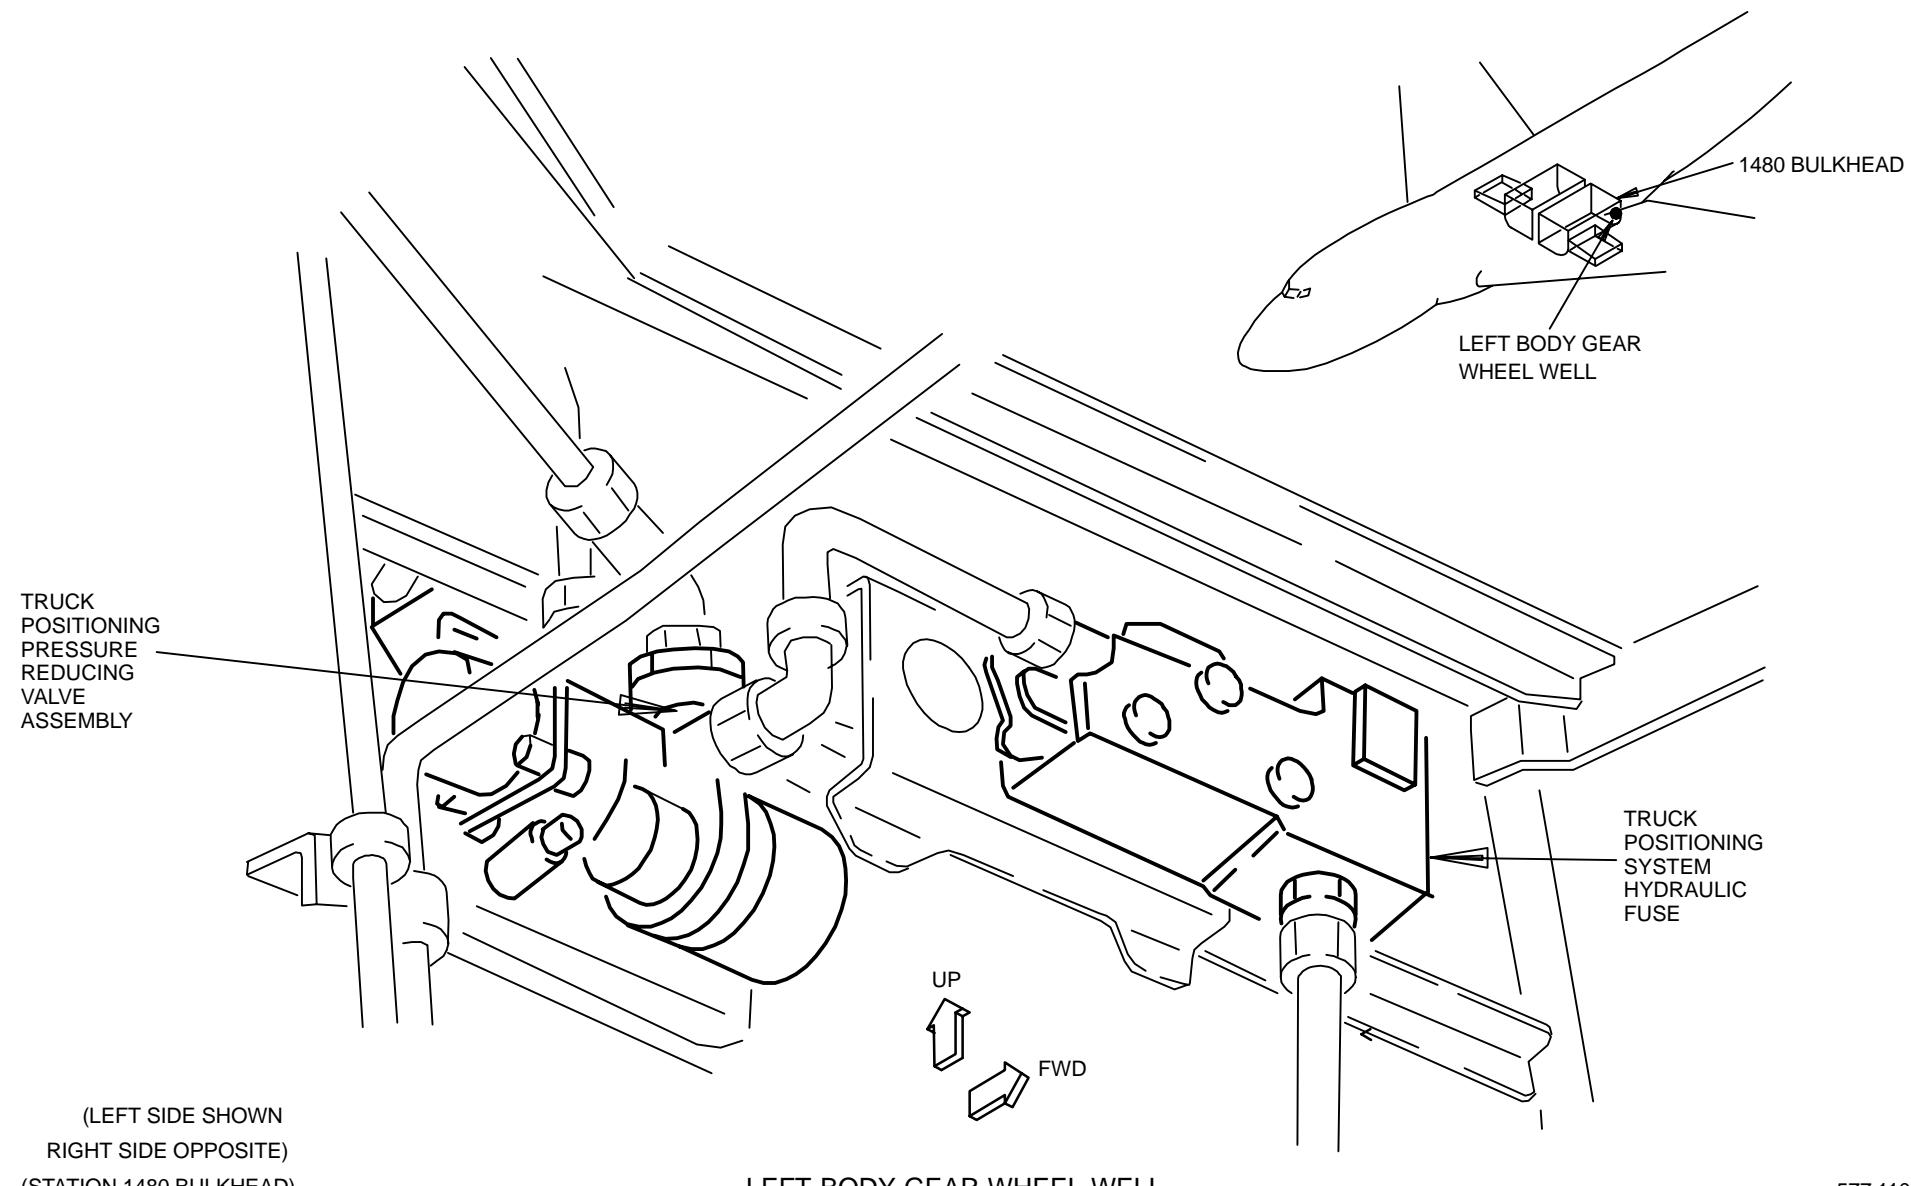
BODY GEAR TRUCK TILT COMPONENTS
